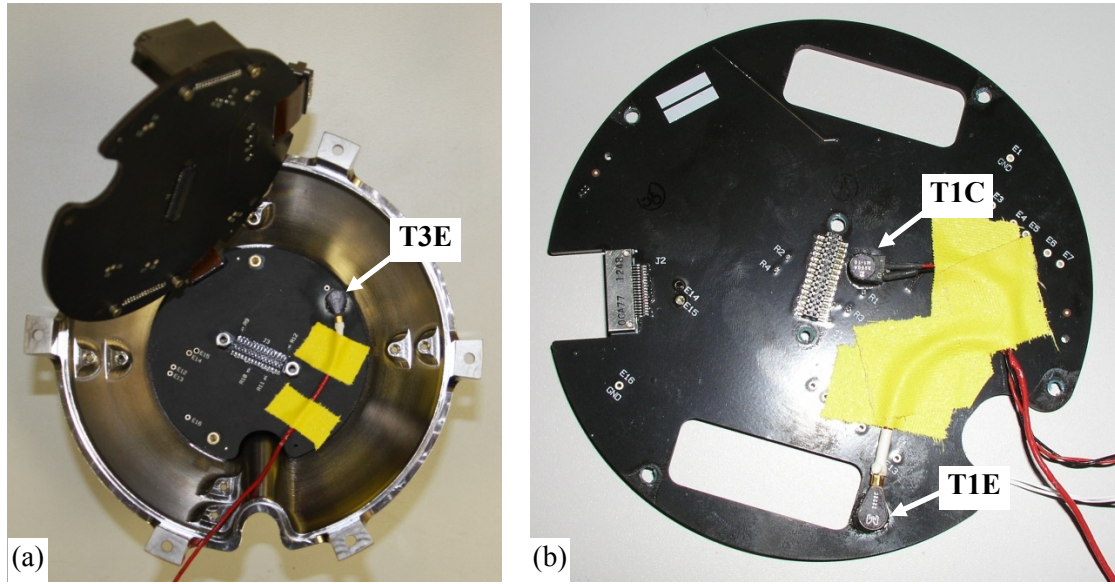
Prototype of the electronics assembly, showing the circuit board enclosure.
